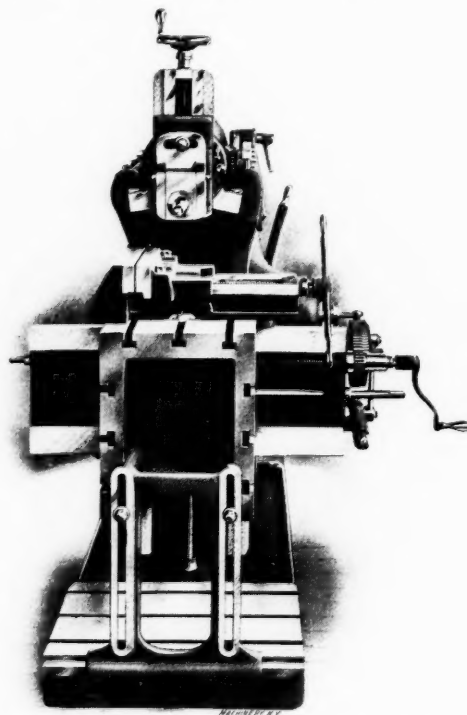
Front View of Walcott & Wood 20-inch Crank Shaper.
